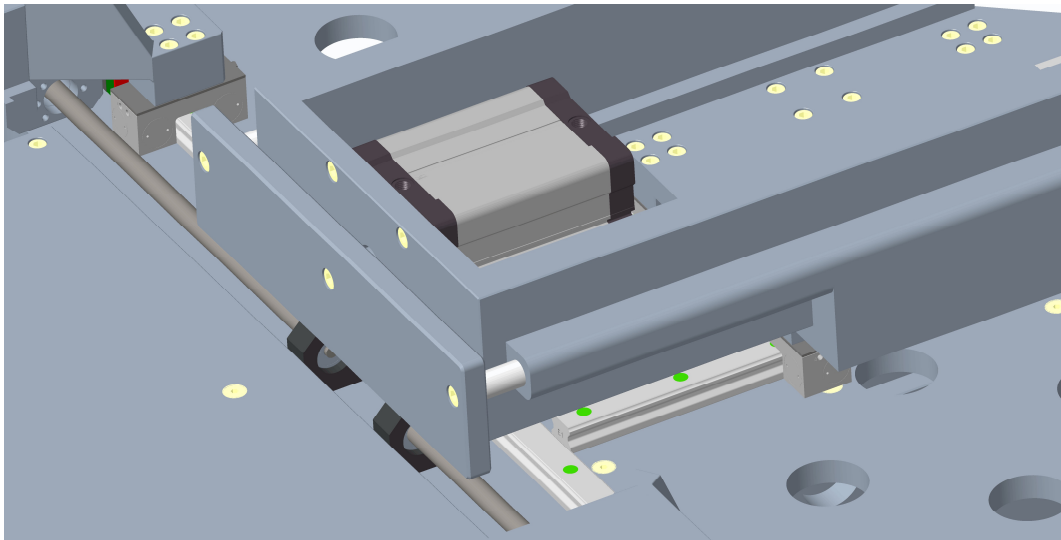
The linear shafts of the pressing assembly supporting the central stopper
